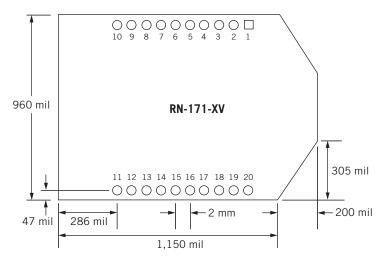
shows the pin pads and dimensions. Table 7 describes the pins.
